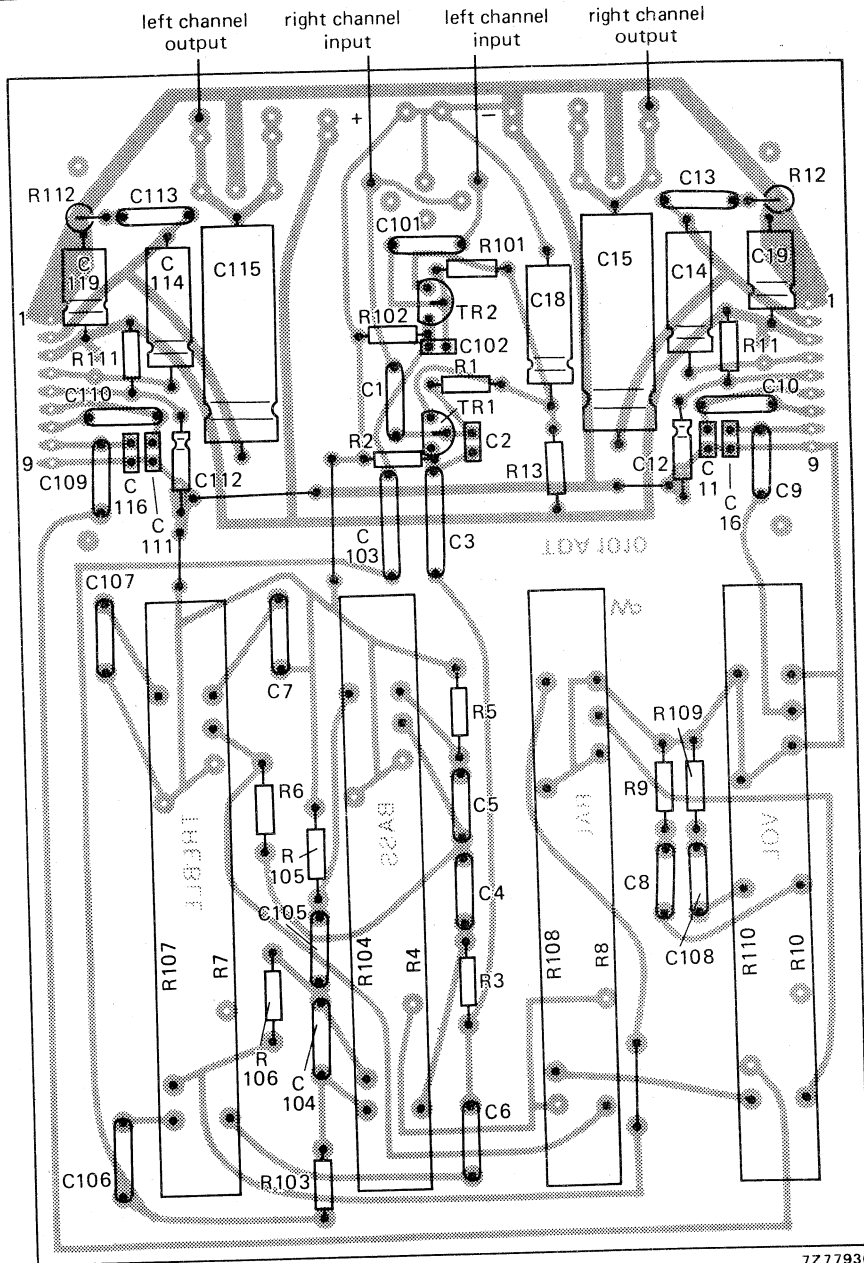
Track side of printed-circuit board used for the circuit of Fig. 17 (Fig. 16 partly); p.c. board dimensions 169 mm x 118 mm.
